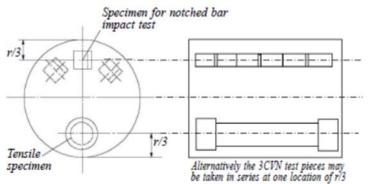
Location of specimens. Steel bar, forging, casting. *Table 7.2.2.3.3* Mechanical properties of mooring chain and accessories
